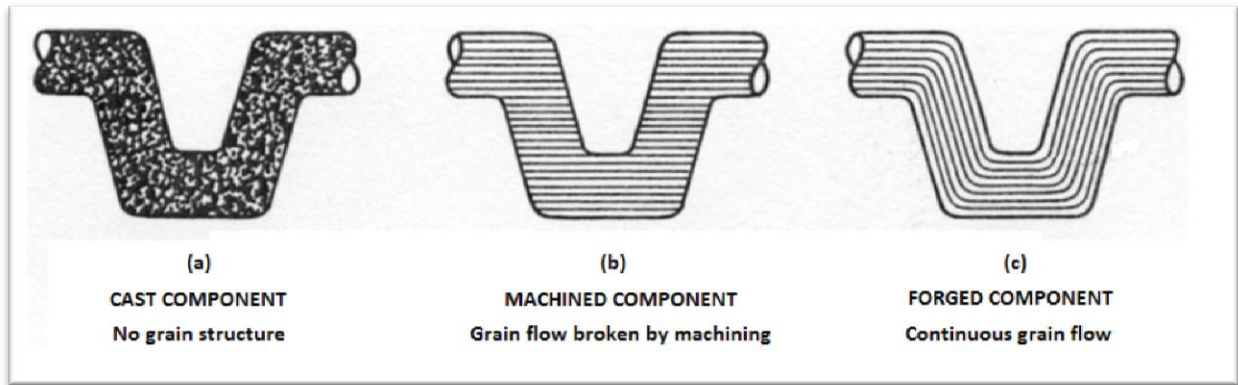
Grain flow in (a) cast component; (b) machined component; and (c) forged component, courtesy of (SIFCO, 2012)
